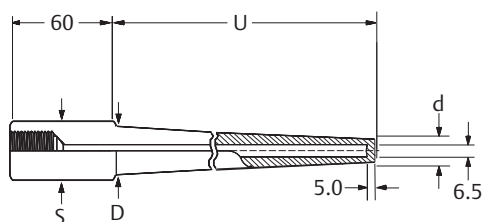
Threaded Barstock Thermowell – Tapered Thread
